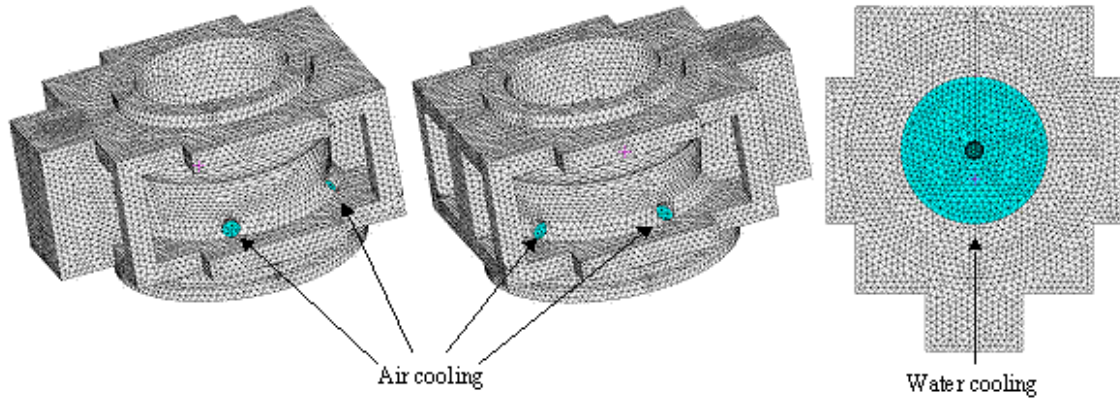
The finite element model of an aluminum wheel and its molds [22].
